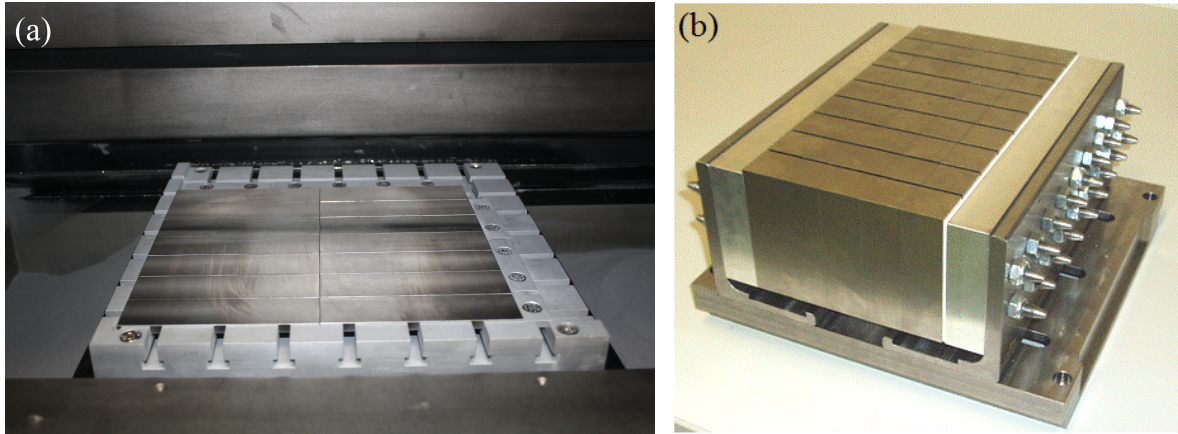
(a) Build chamber of EOSINT M270 with 14 substrates secured to a universal base-plate. (b) A custom fixture was used for ARCAN specimens; 45 could be built simultaneously.
